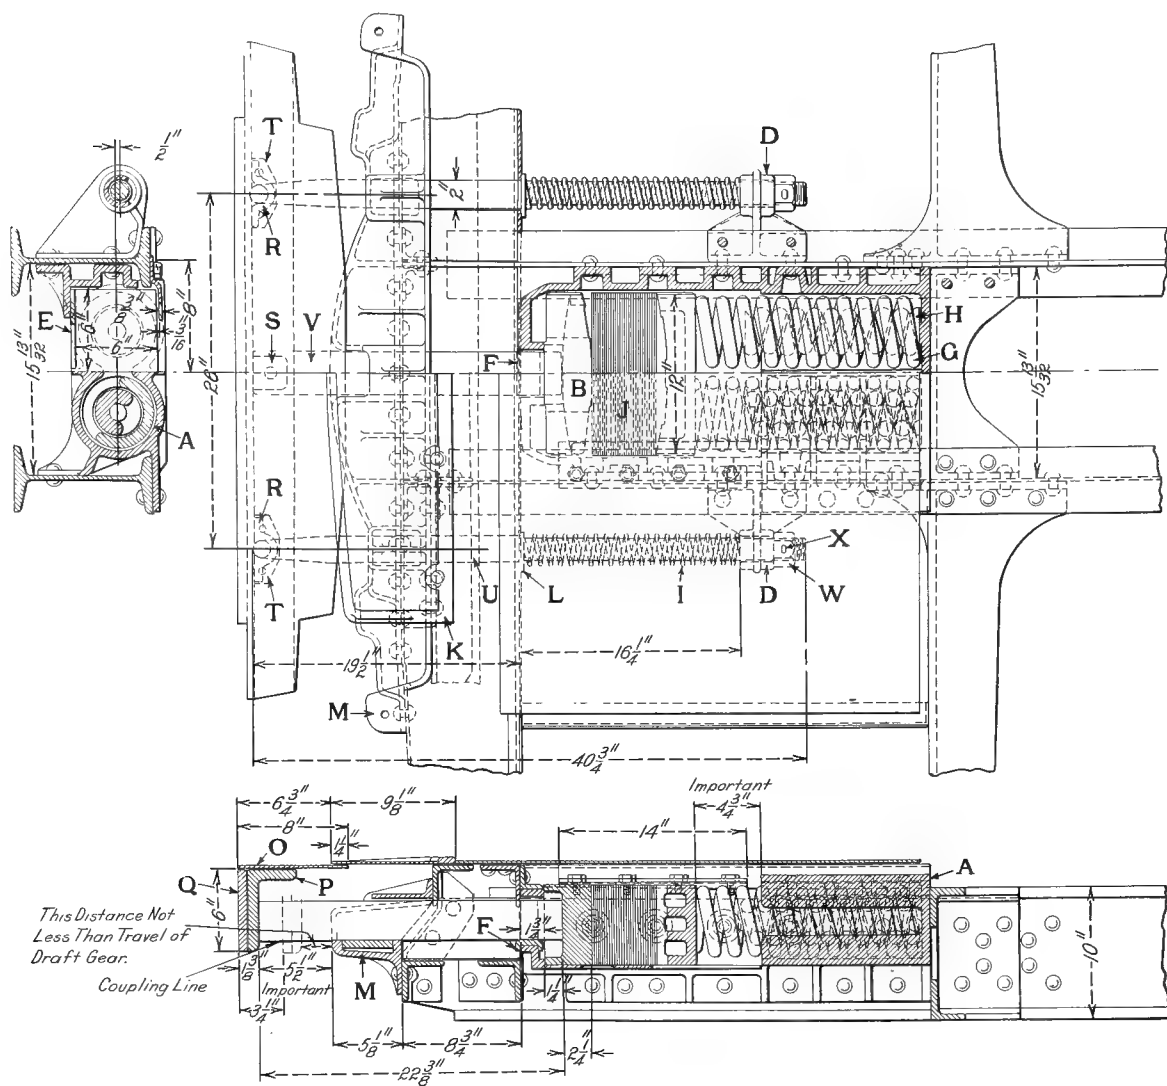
Waugh-Forsyth High Capacity Buffering Device Applied to Built Up Steel Platform. Waugh Draft Gear Company.
